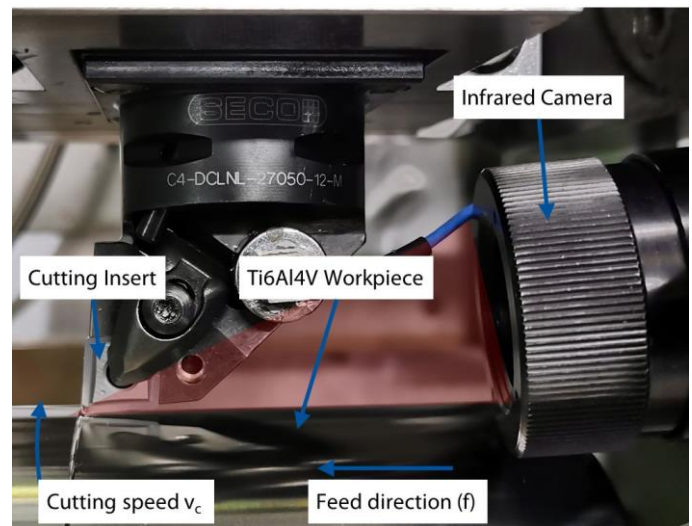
Experimental setup on CNC lathe Gildemeister MD5S for cutting tests without lubricating coolant
